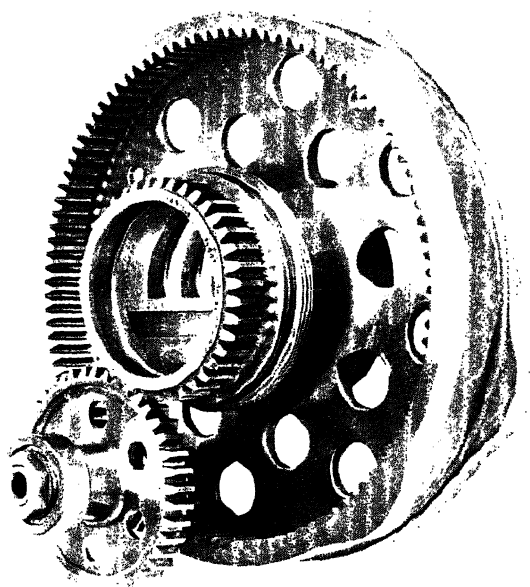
Bristol "Mercury" engine cam rings and gear drive.
